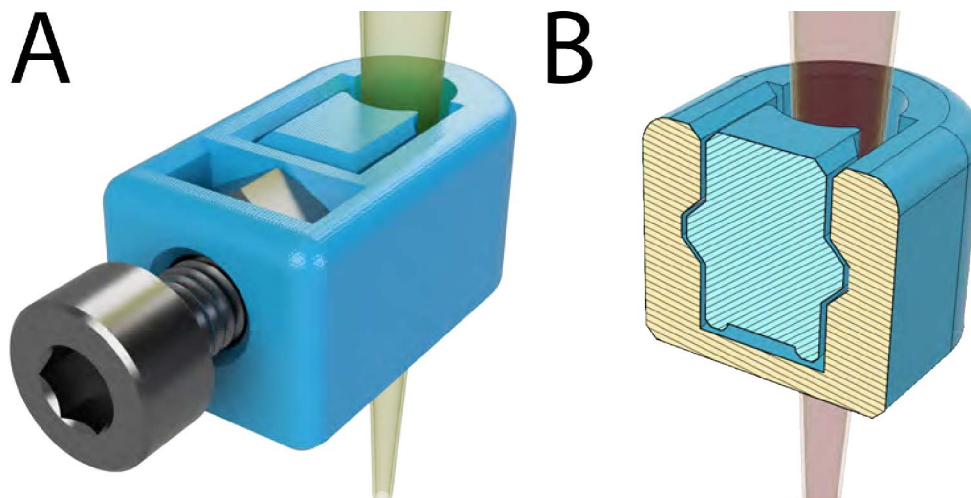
A) Skimmer clamp, assembled. B) Print-in-place clamping mechanism. Note how the slide does not contact the surrounding clamp body at any point but is fully contained.
